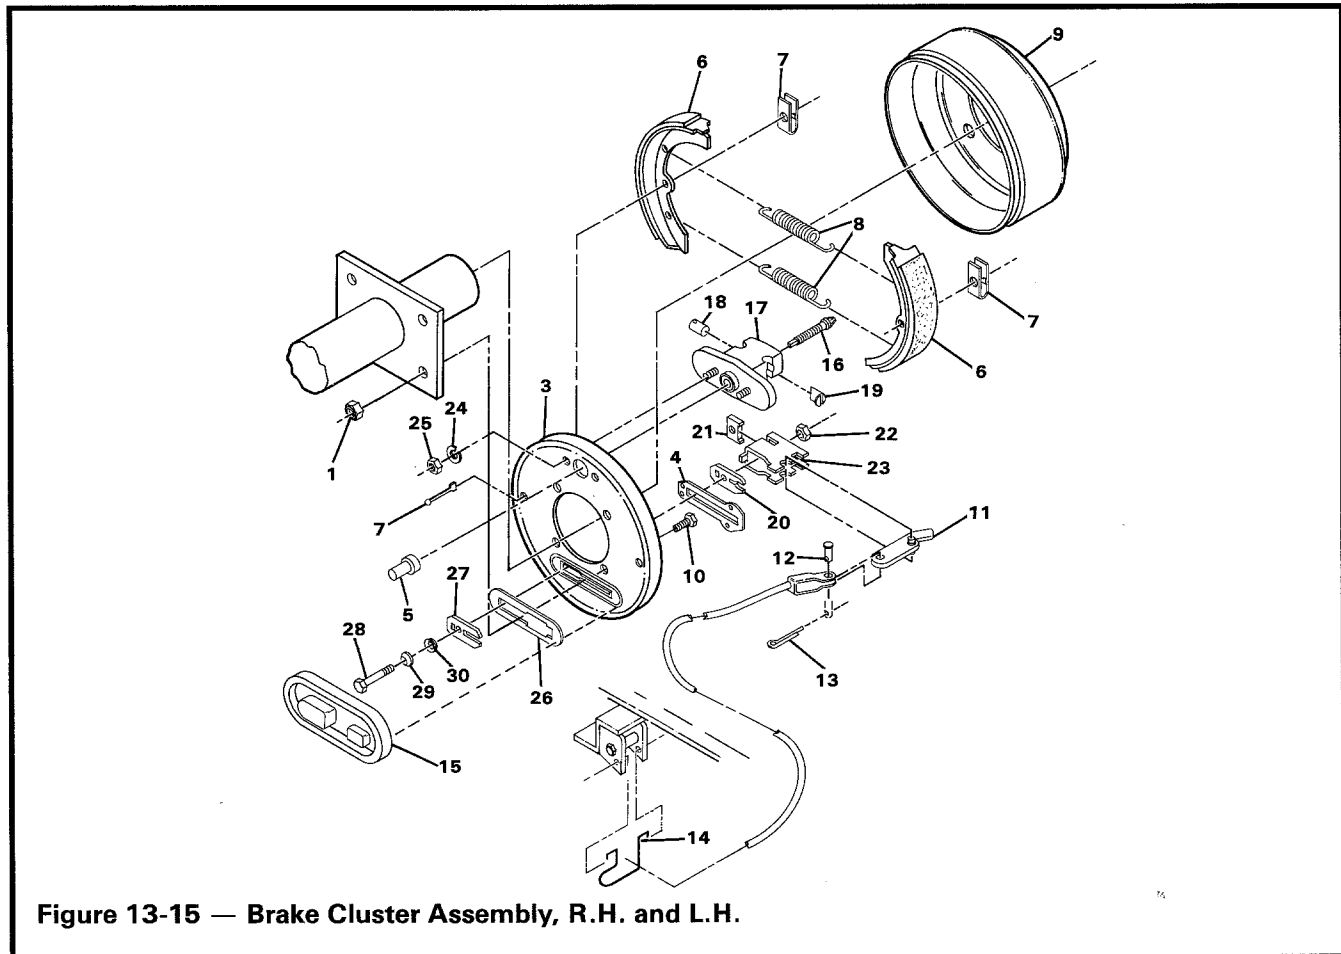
Brake Cluster Assembly, R.H. and L.H.
